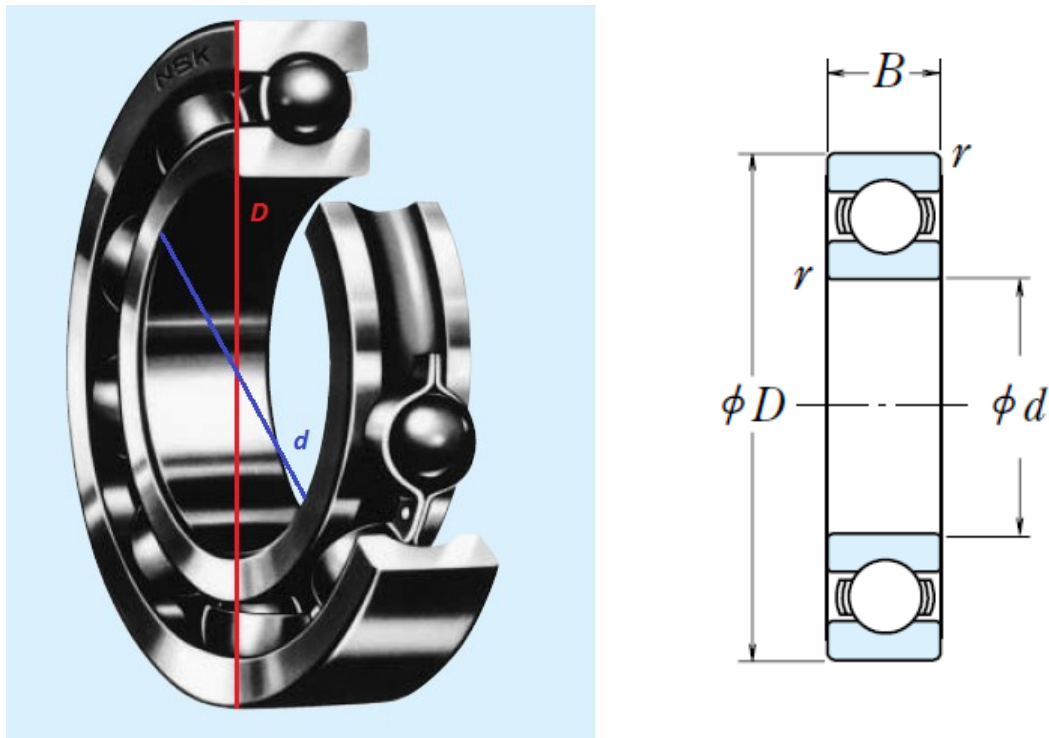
a) Inner and outer diameters and b) a cross-section of a ball bearing (NSK 2011, p. B 4-8)
